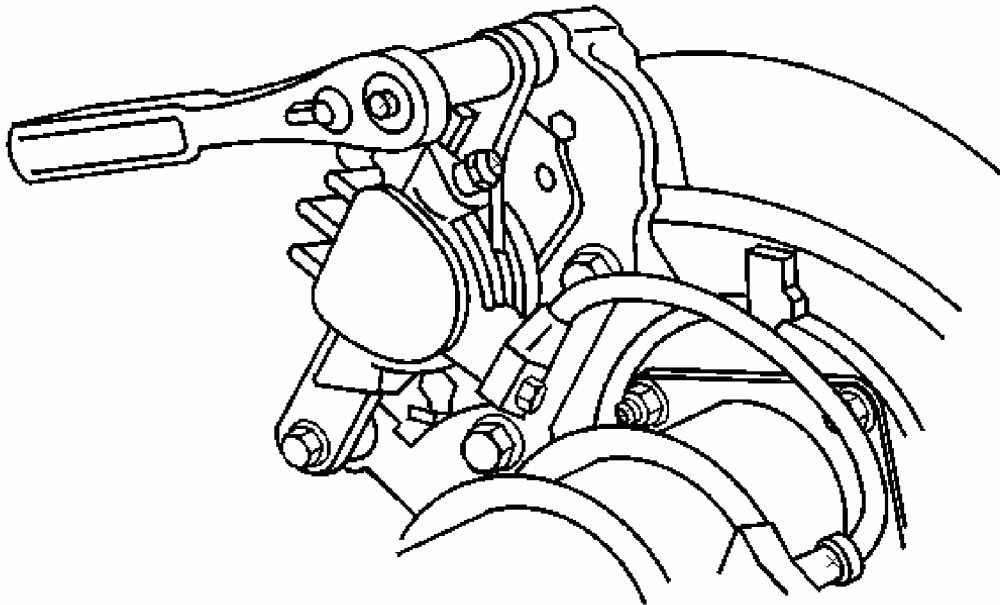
View Of Upper Brake Caliper Mounting Bolt
